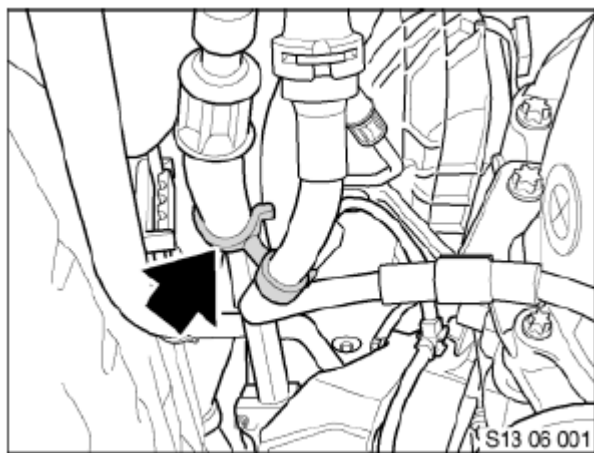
Identifying Spacer Between Fuel Line And Pressure Hose Of Clutch Slave
